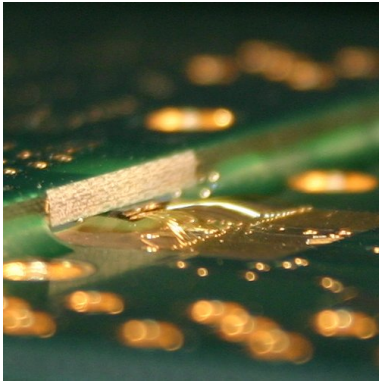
Capacitive-Coupled Pixel Detector (CCPD1) placed between two PCB boards and wire bonding of one side.
